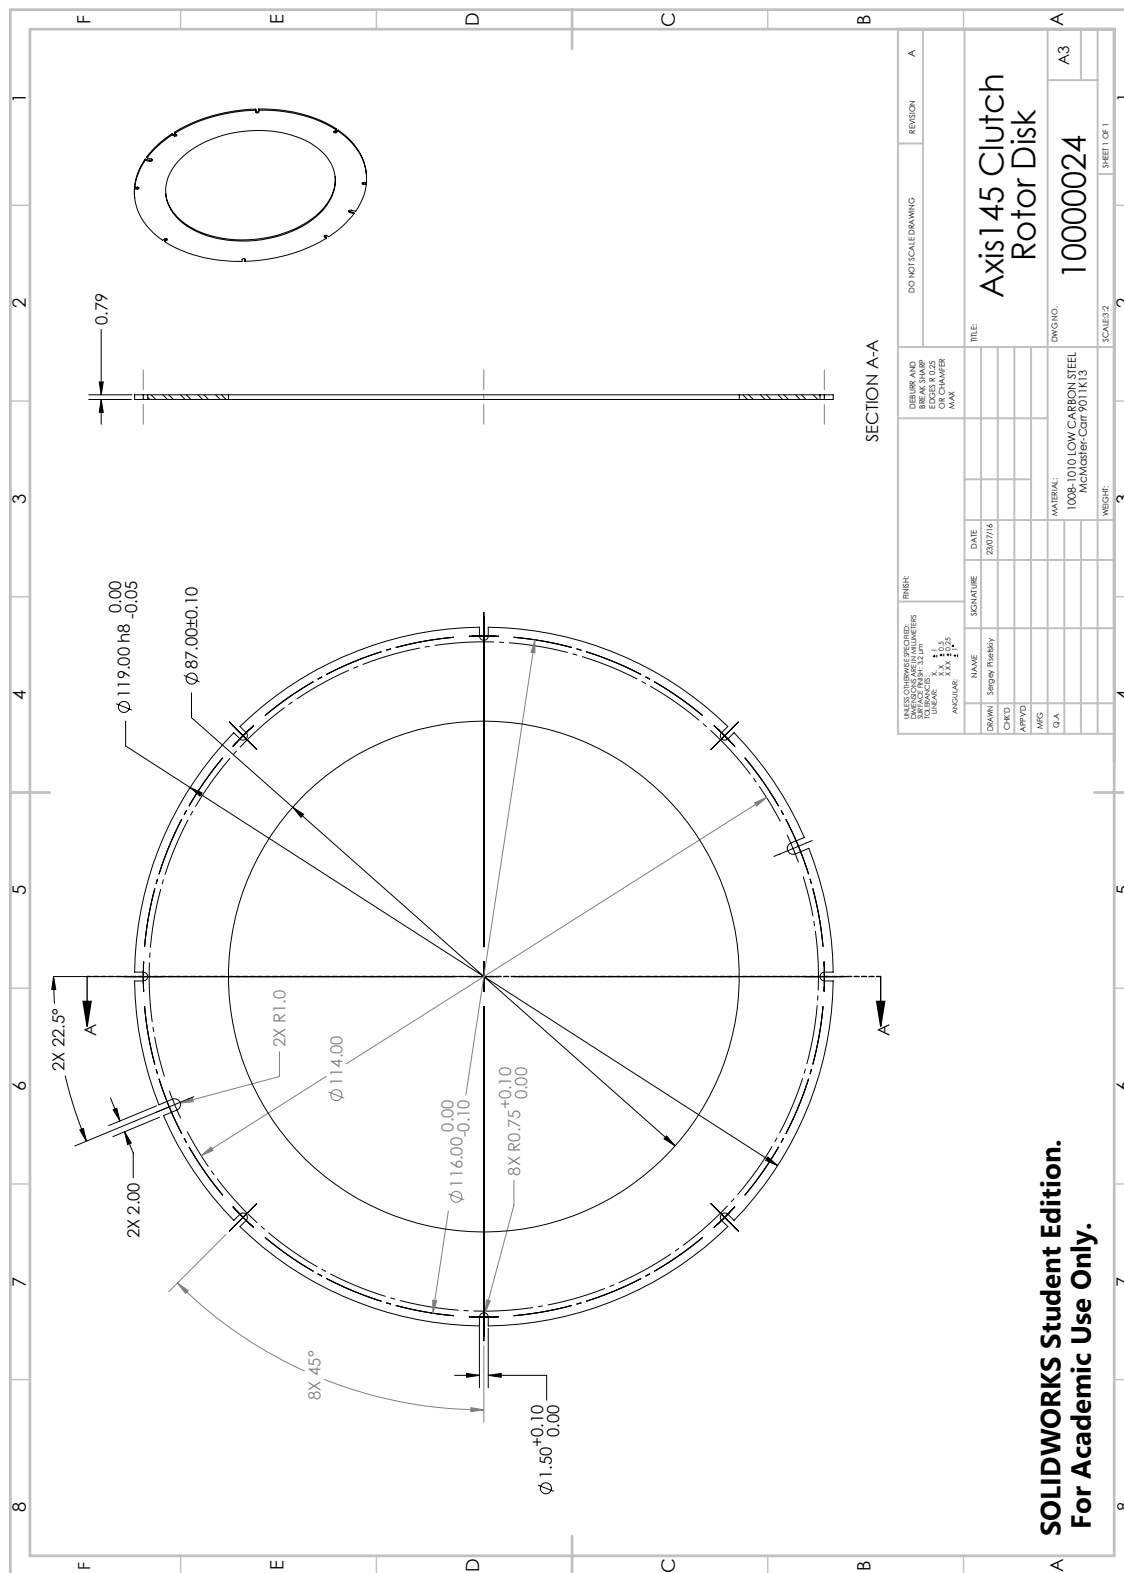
Drawing: Joint 1, 4, 5 clutch rotor disk.
